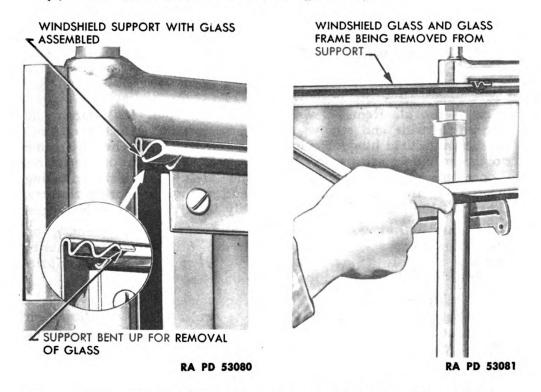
Windshield Support Figure 202—Removing Wind-(Open Bodies) shield Glass Assembly (Open Bodies)
